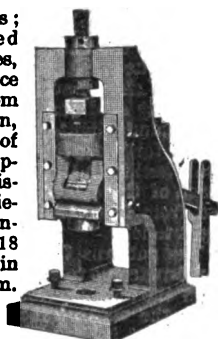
KNUCKLE-JOINT FOOT PRESS,
